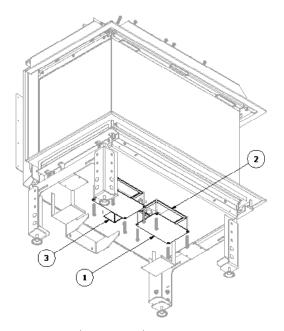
Dismantling of anti-explosion dampers (of revisions): 1 - damper plate; 2 - sealing; 3 - control burner channel
